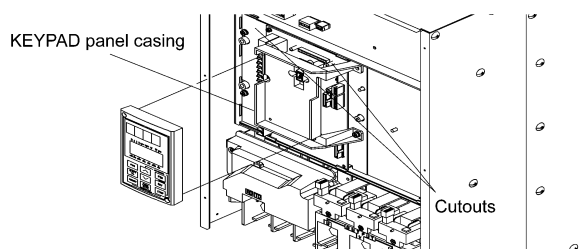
Removal of KEYPAD Panel (18.5 kW or higher)
